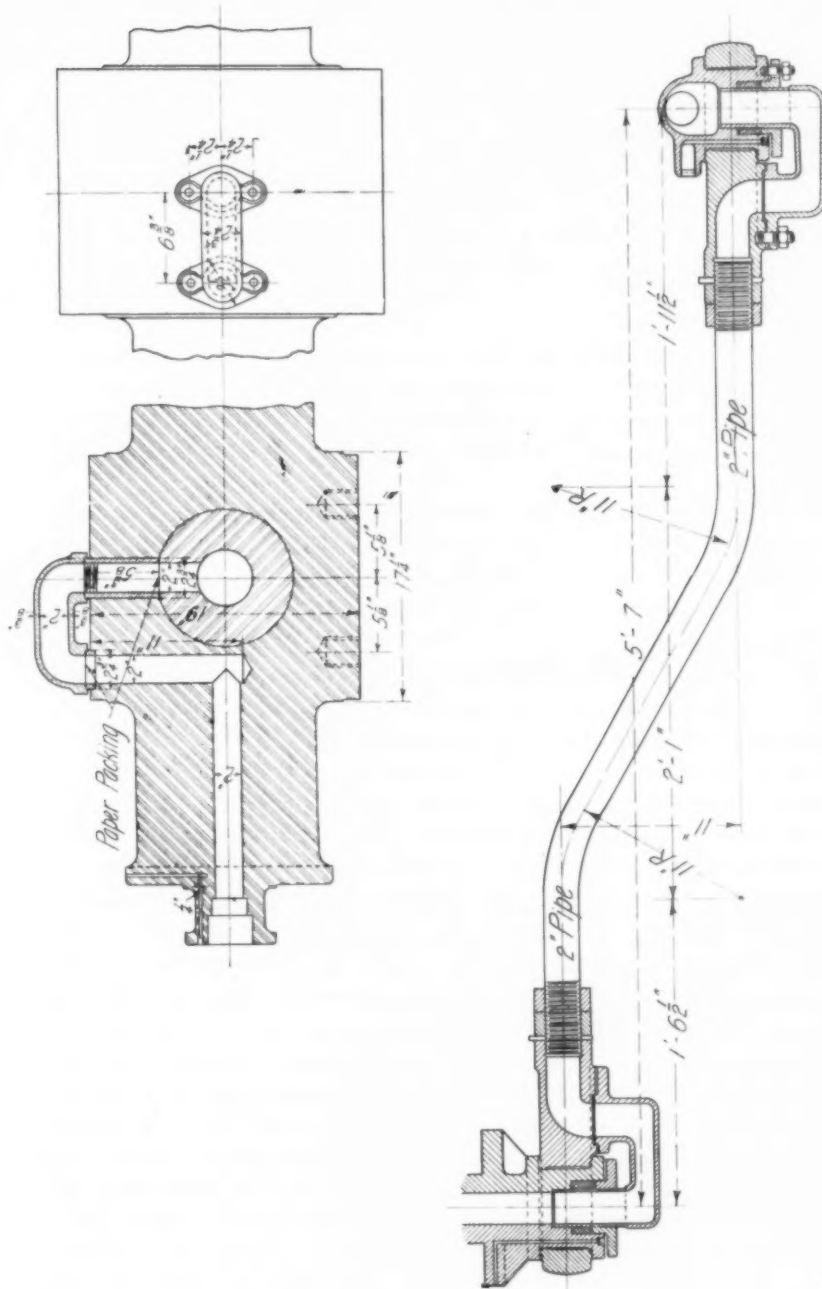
DETAILS OF WATER CONNECTION FOR PISTON ROD
